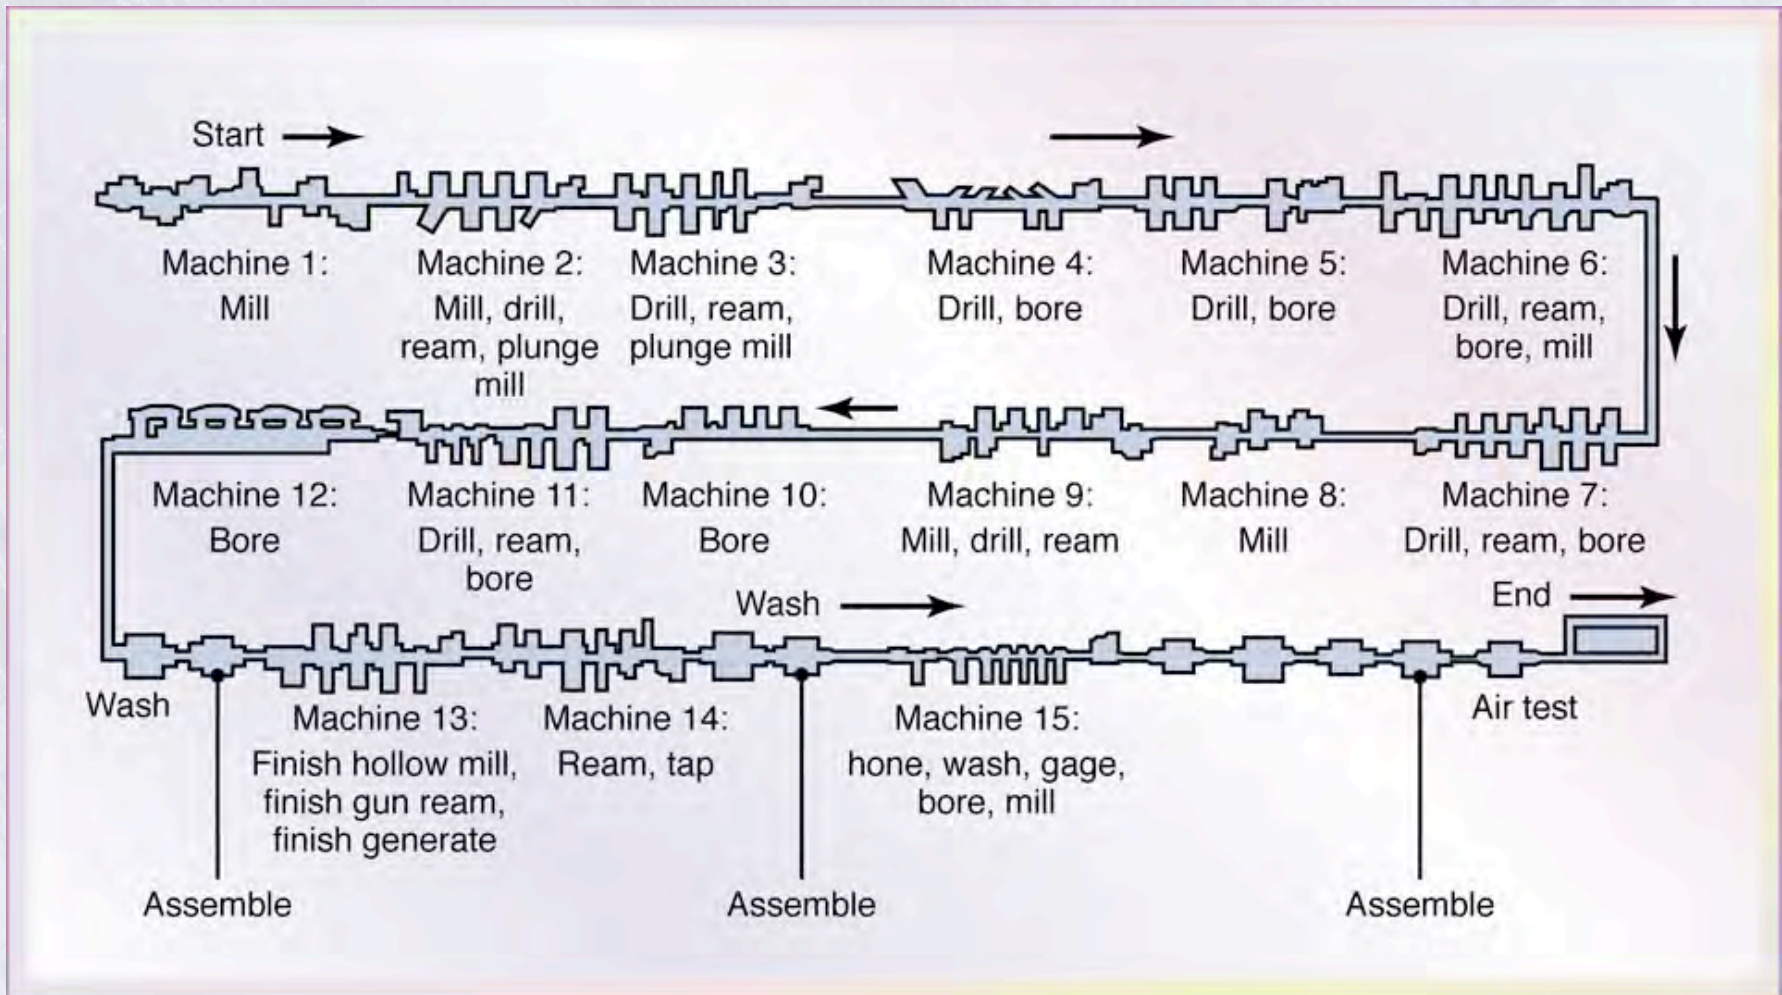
A large transfer line for producing engine blocks and cylinder heads.
